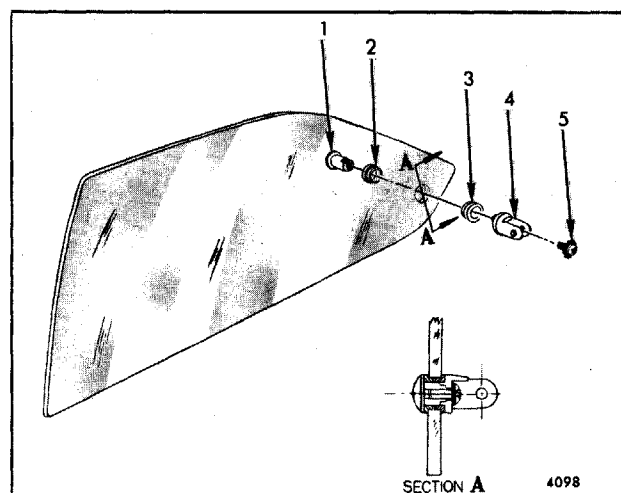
Optional Swing-Out Quarter Window Latch Assembly Support
